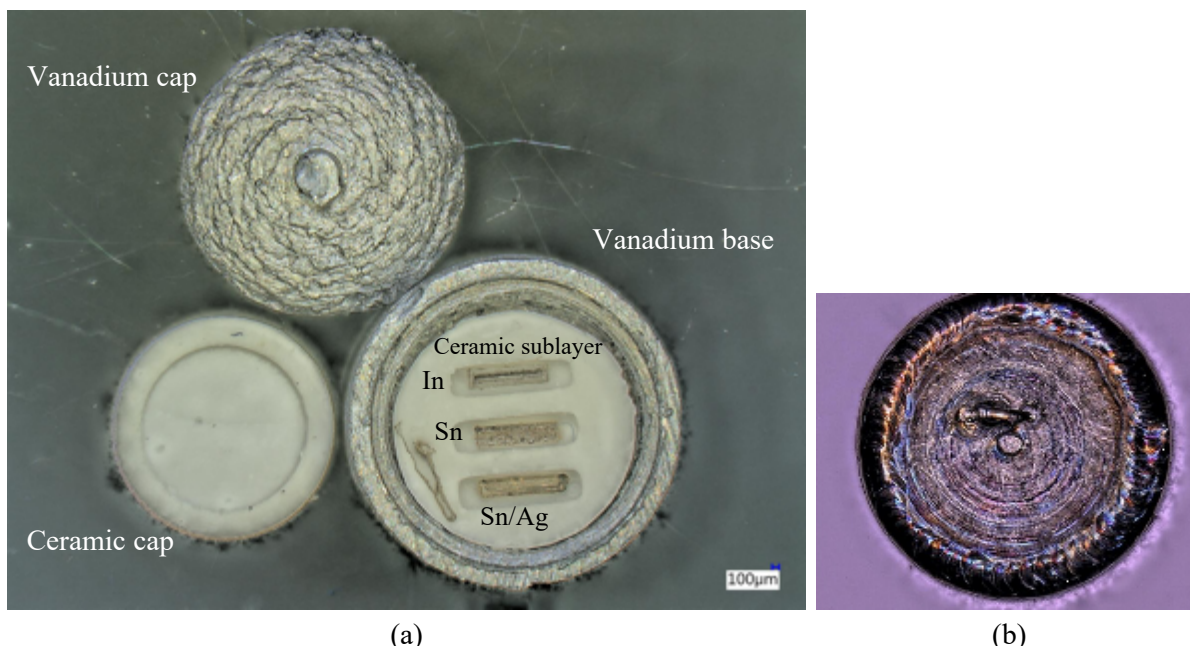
(a) The entire printed melt wire package prior to welding the vanadium container. (b) Post-welding.
